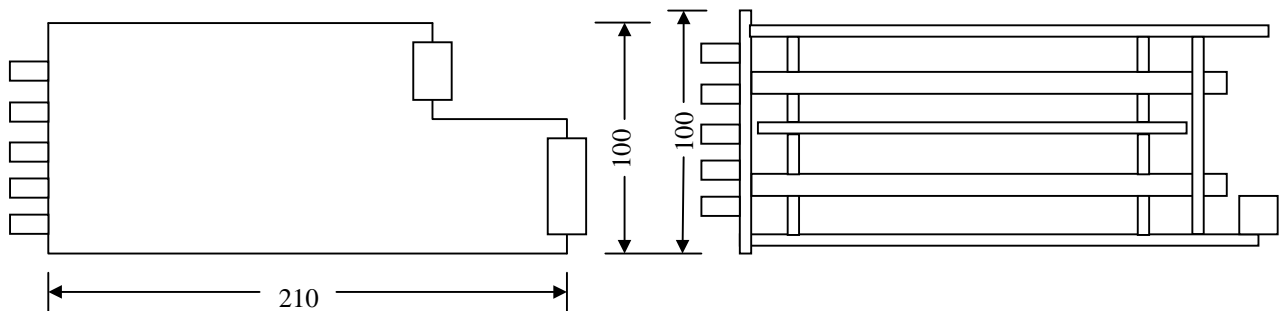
OSD8100 MOUNTING DIMENSIONS AND FRONT PANEL
